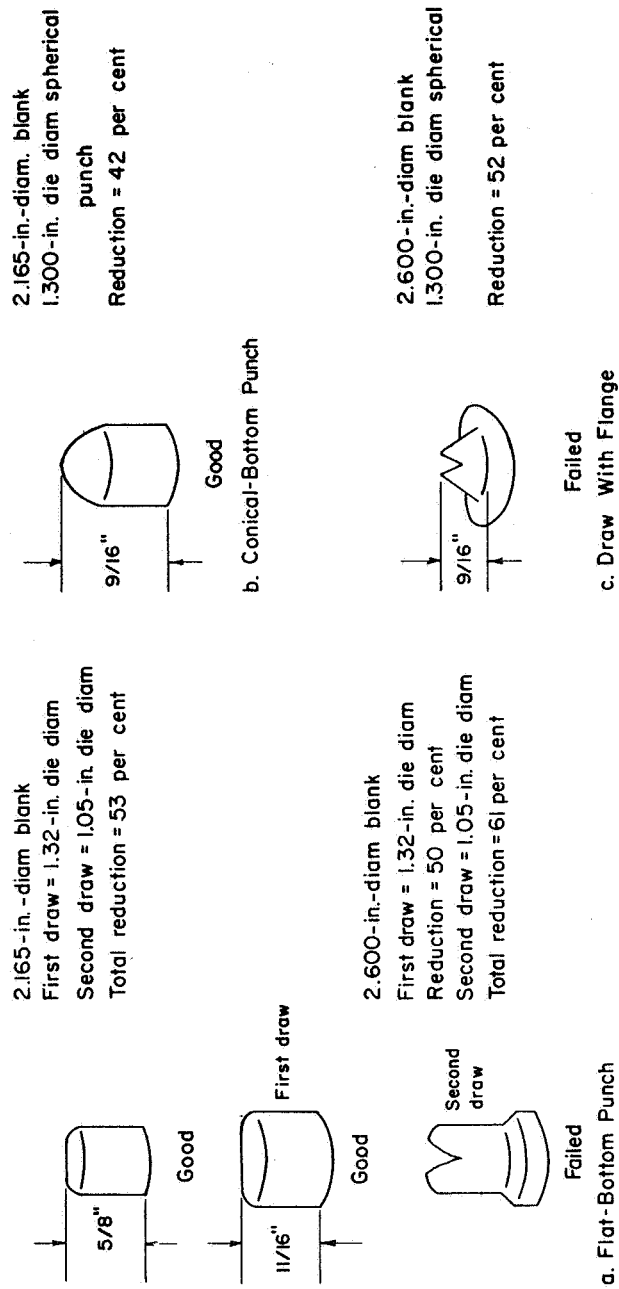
DEEP-DRAW TEST OF ANNEALED ALMAR 362 (REF. 60)
